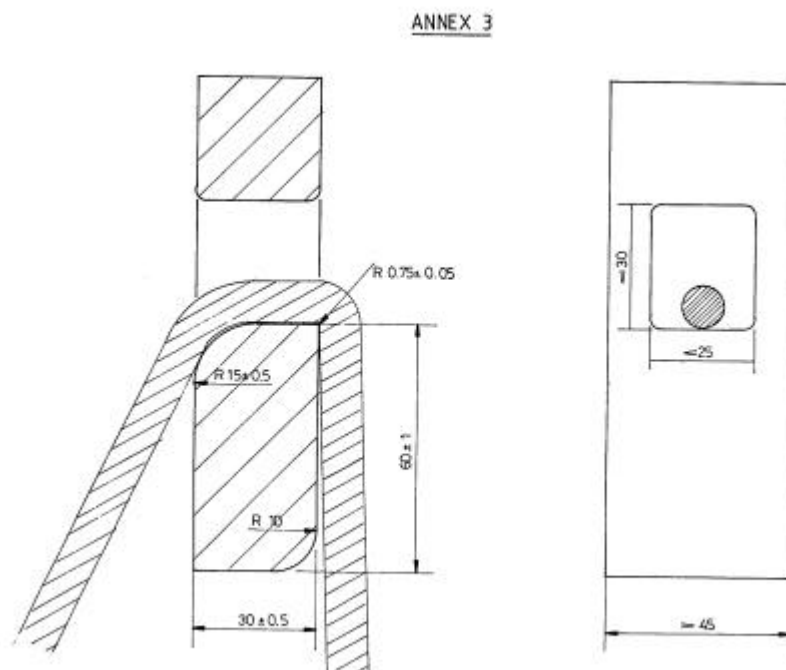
Layout of sharp edge tool - Mammut / Beal
